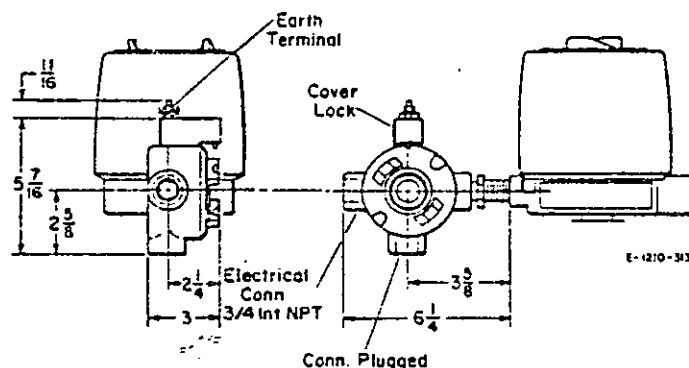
A. Mounting Dimensions for European Flameproof Electrical Connection
